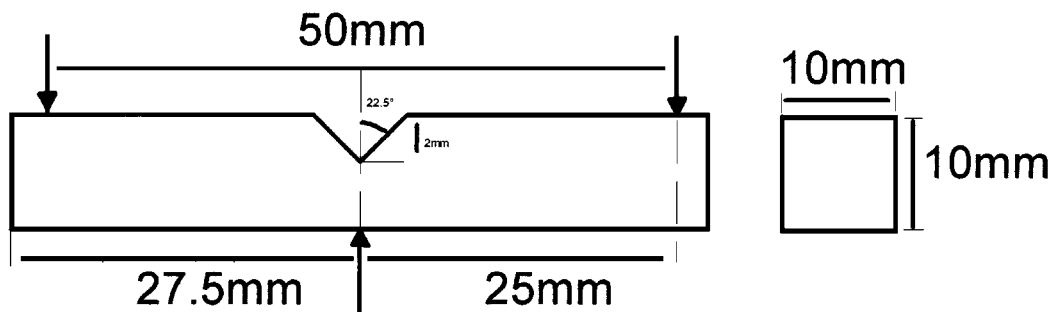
Diagram showing the dimensions of the specimens used for three point bend testing and the location of the loading.
